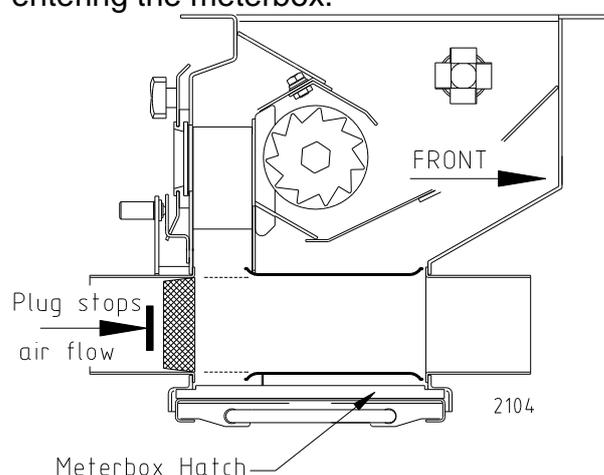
Meterbox Cross Section on a Rear Tow Air Seeder. Reverse the plug location on Front Tow Seeders.
